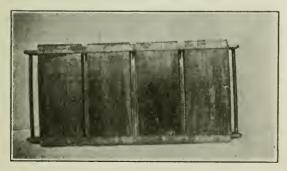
(a) A back view of the mould shown in Fig. 5.
